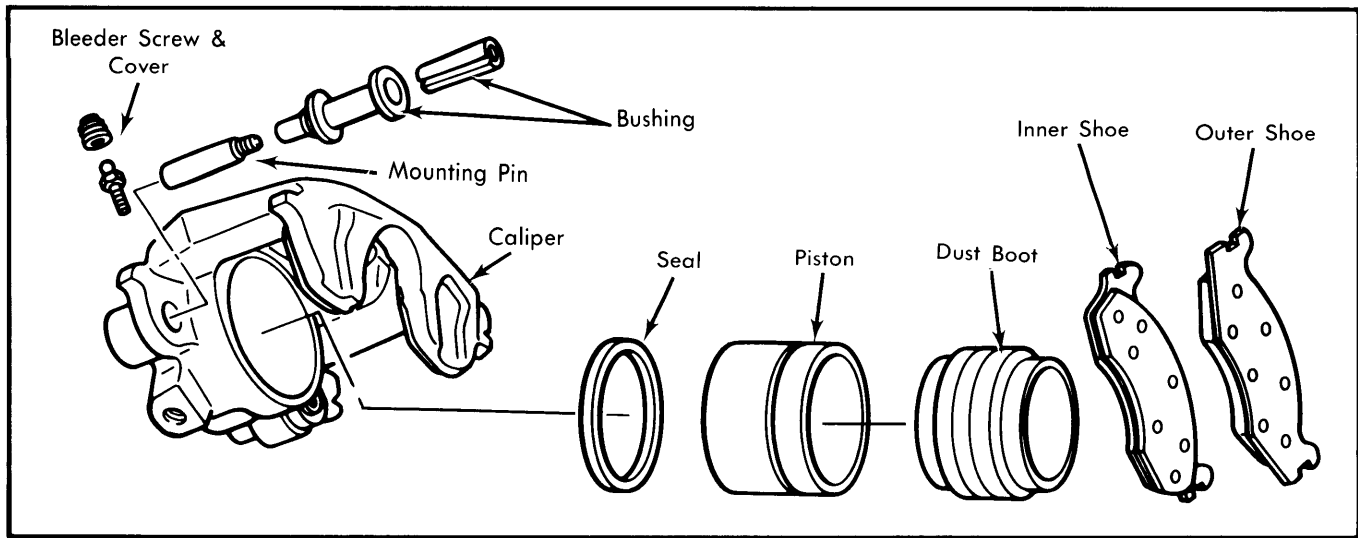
Exploded View of American Motors Front Sliding Caliper Assembly
